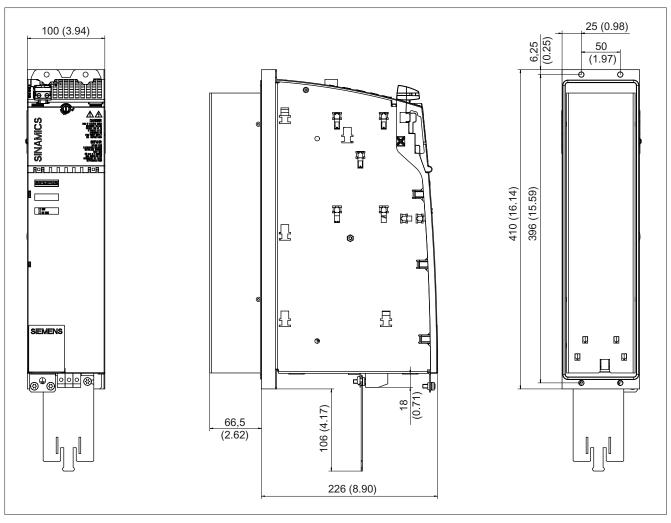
Dimension drawing of 16 kW Smart Line Module with external air cooling, all dimensions in mm and (inches)
